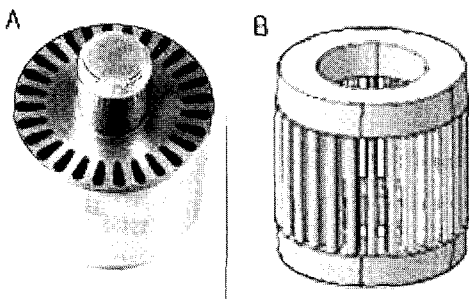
Rotor core assembly (A) and squirrel cage (B)
